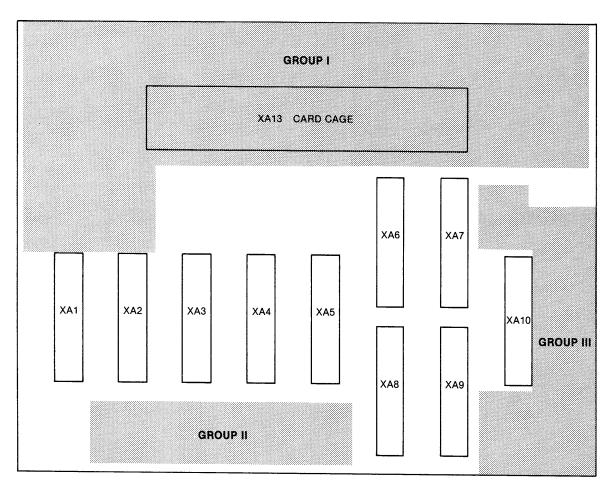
A14 Motherboard PCB, Circuit Groups
